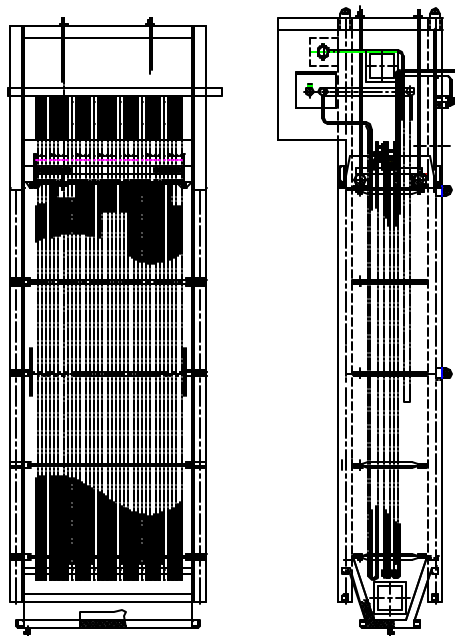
Vertical Tube/Horizontal Gas Flow Arrangement
